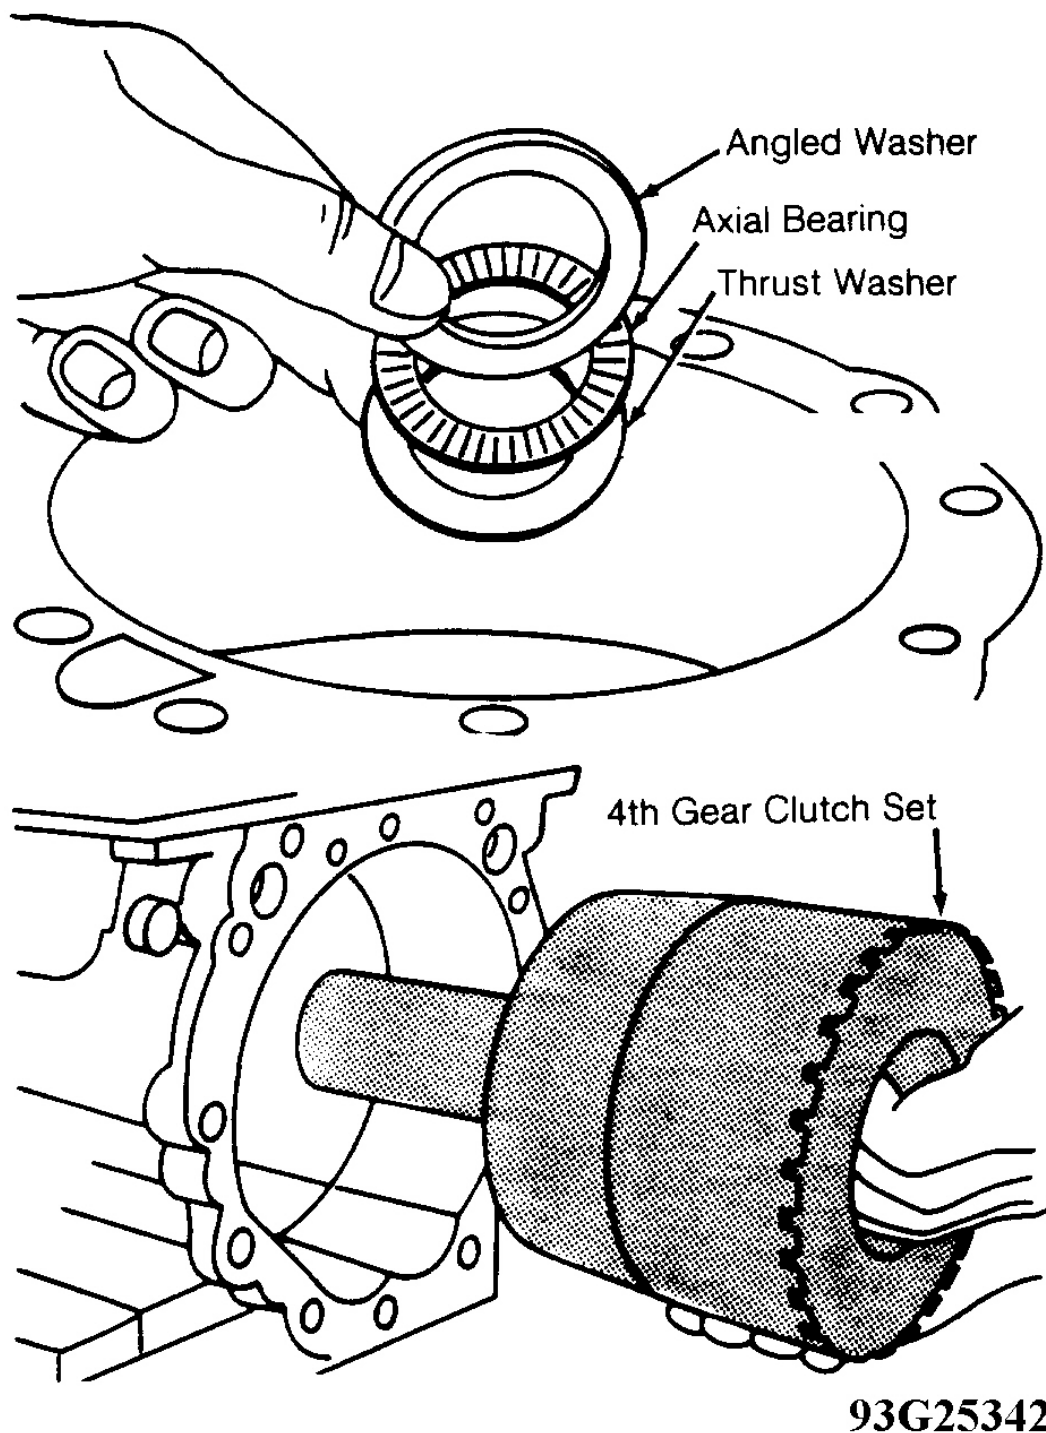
Removing Angled Washer, Axial Bearing, Thrust Washer & 4th Gear Clutch Set
